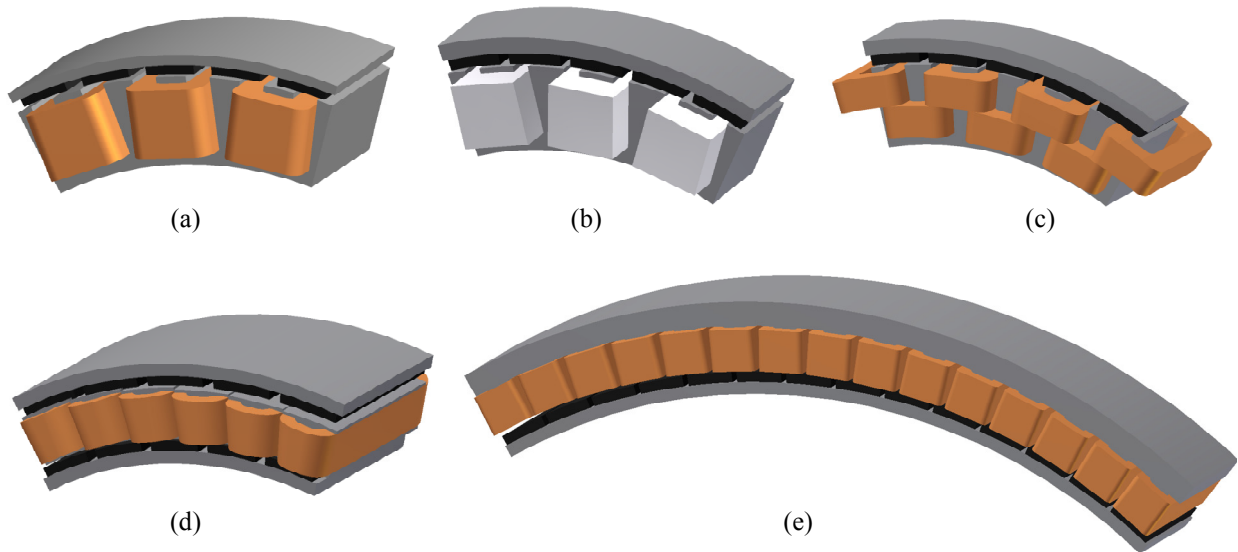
Sections of the studied PM machines, with (a) Machine 1 [11], (b) Machine 2 [12], (c) Machine 3 [12], (d) Machine 4 [13] and (e) Machine 5 [14].
